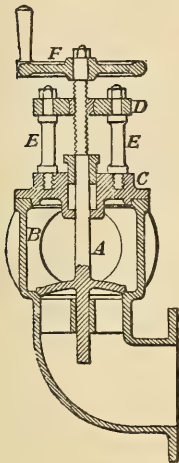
Bilge Injection Valve. — A, Spindle and valve. B, Chest. C, Cover. D, Crosshead. E E, Columns. F, Hand wheel.
